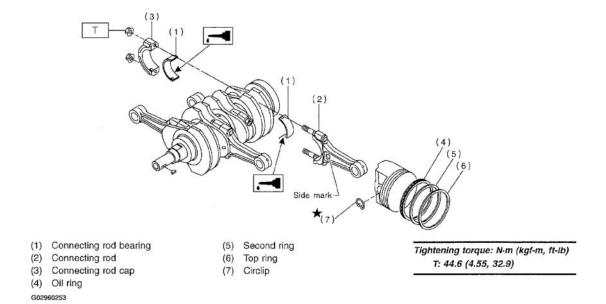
Assembling Connecting Rod & Piston Rings Courtesy of SUBARU OF AMERICA, INC.
